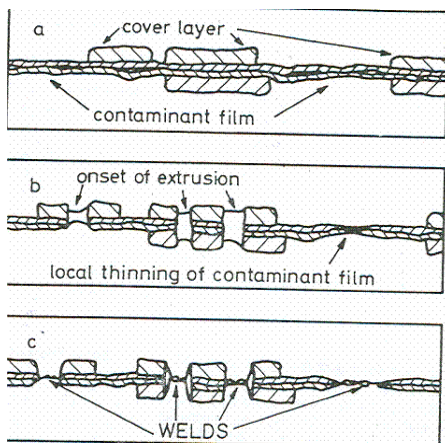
The bond formation mechanism in cold pressure welding [4]
